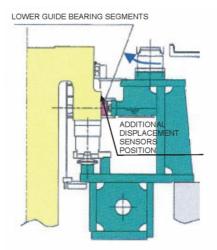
Positions of the sensors which measure radial clearance of the lower guide bearing.
